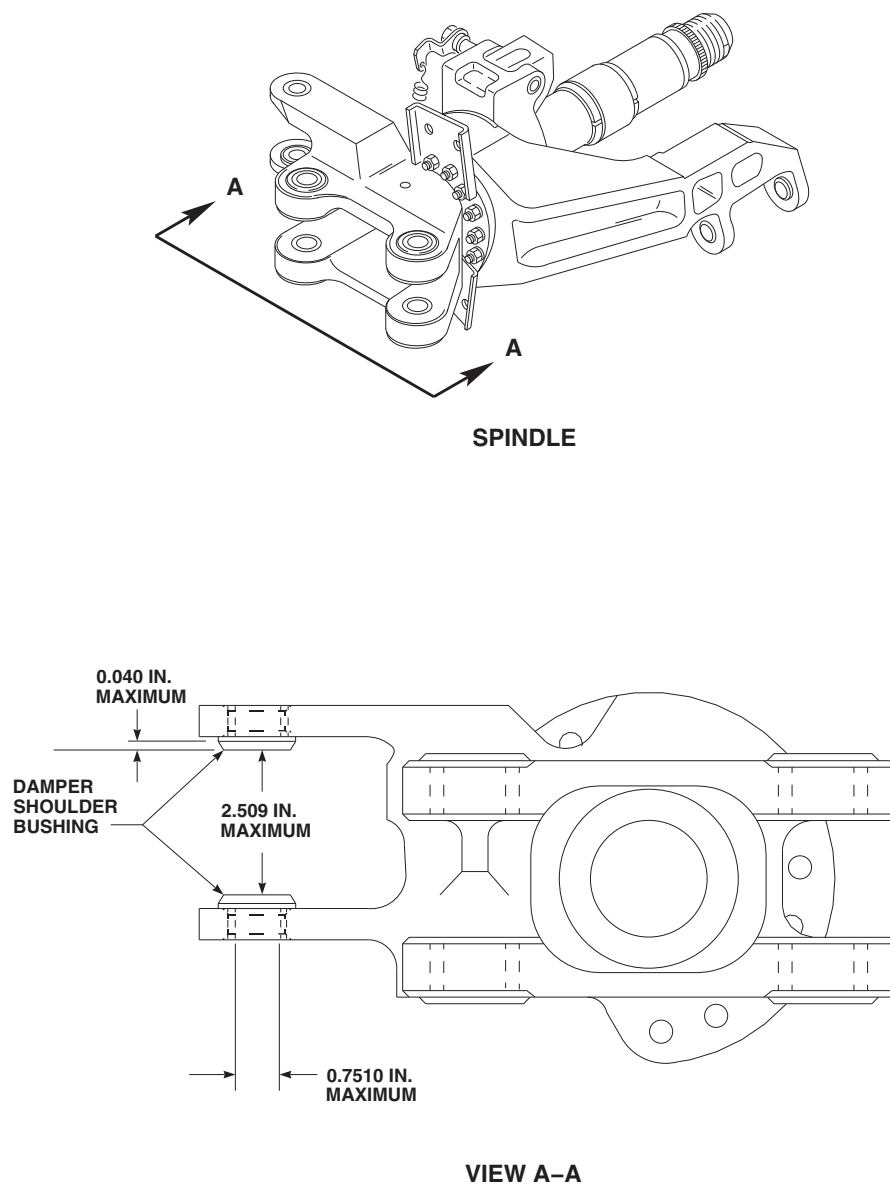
INSPECT DAMPER SHOULDER BUSHINGS
